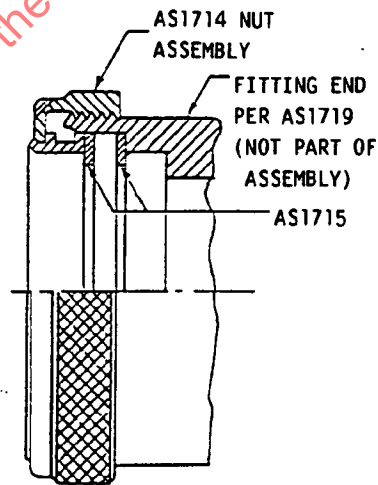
AS1713 HALF COUPLING SUBASSEMBLY /12/
